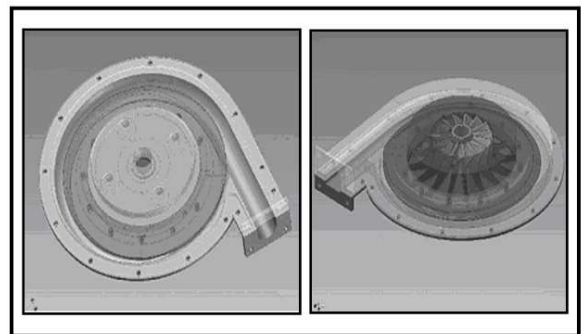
Multiple views solid model of the centrifugal compressor assembly.
